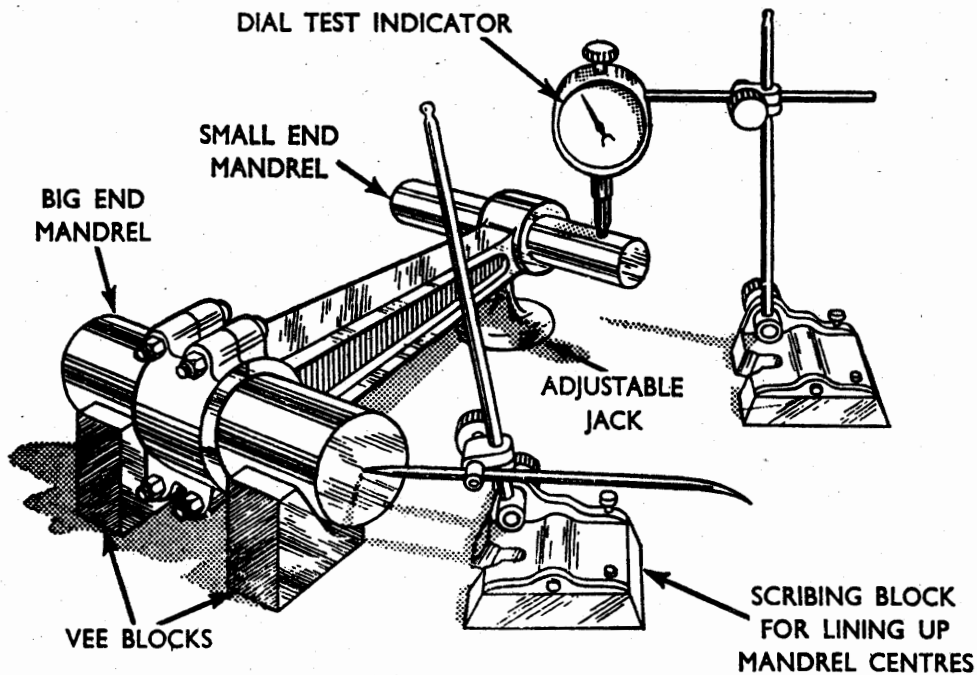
CHECKING A CONNECTING ROD FOR TWIST
